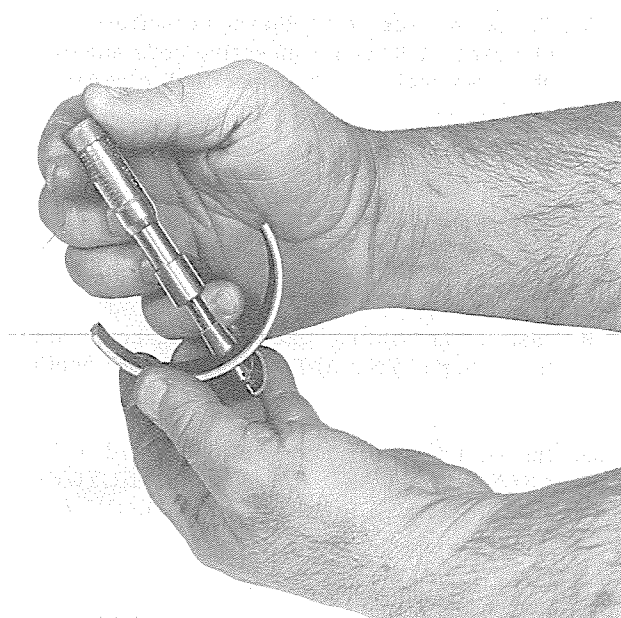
Measuring Bearing Shell Thickness (T-19046)
